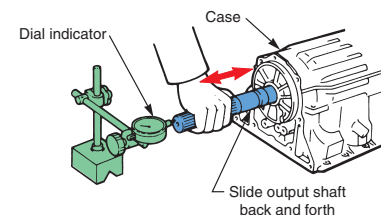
After assembling all the drive train parts, recheck endplay to ensure that you have installed the proper selective thickness thrust washer. (DaimlerChrysler)
